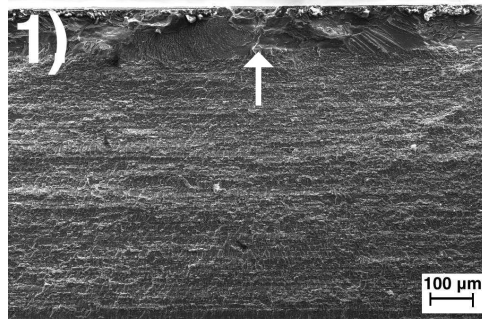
Initiation point along the top surface to the right of the fatigue crack of AA6082.50-T6 base material.
